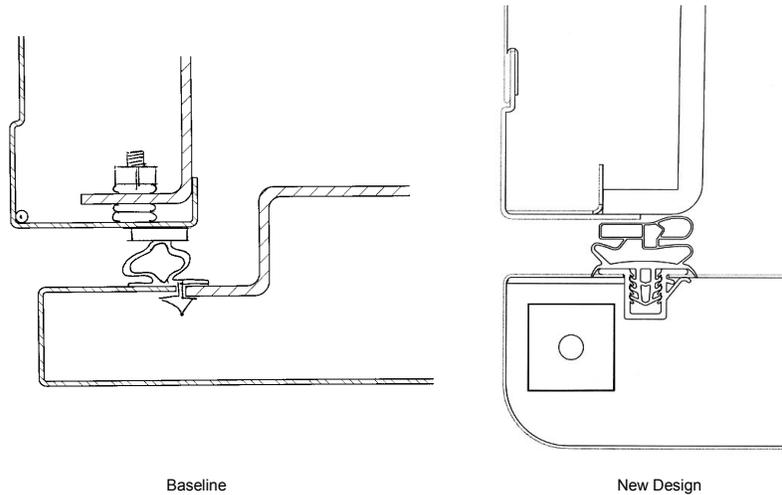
Baseline and New-Design Perimeter Face Frame Cross Sections
